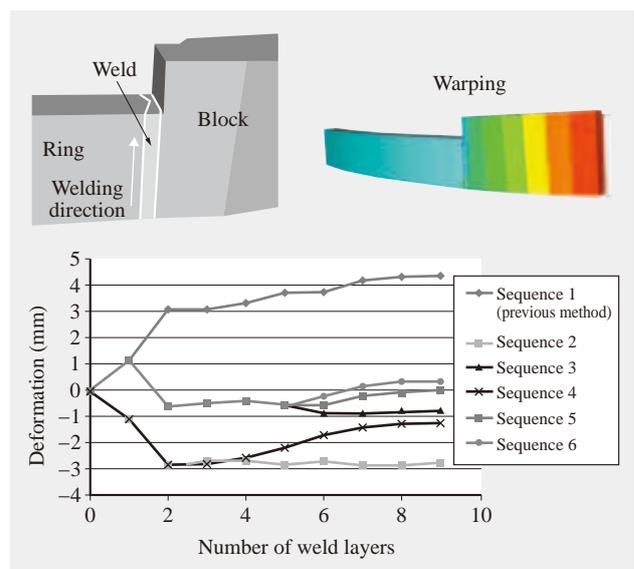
Example of Reduction in Welding Distortion. This work aims to use the sequence of successive weld layers to minimize welding distortion.
